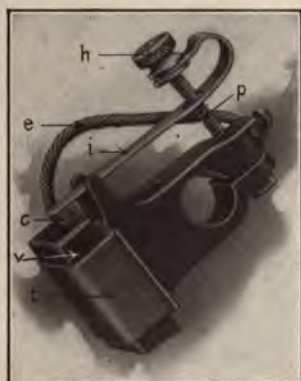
Brush Holder used on Motors shown in Figs. 332, 333 and 334.
